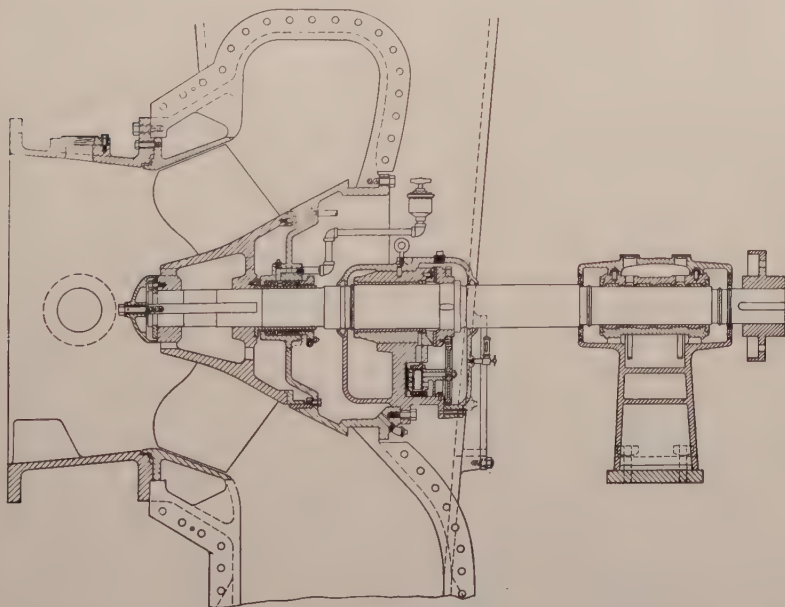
Cross section showing general construction of Worthington Screw Pump for drainage and irrigation work.
